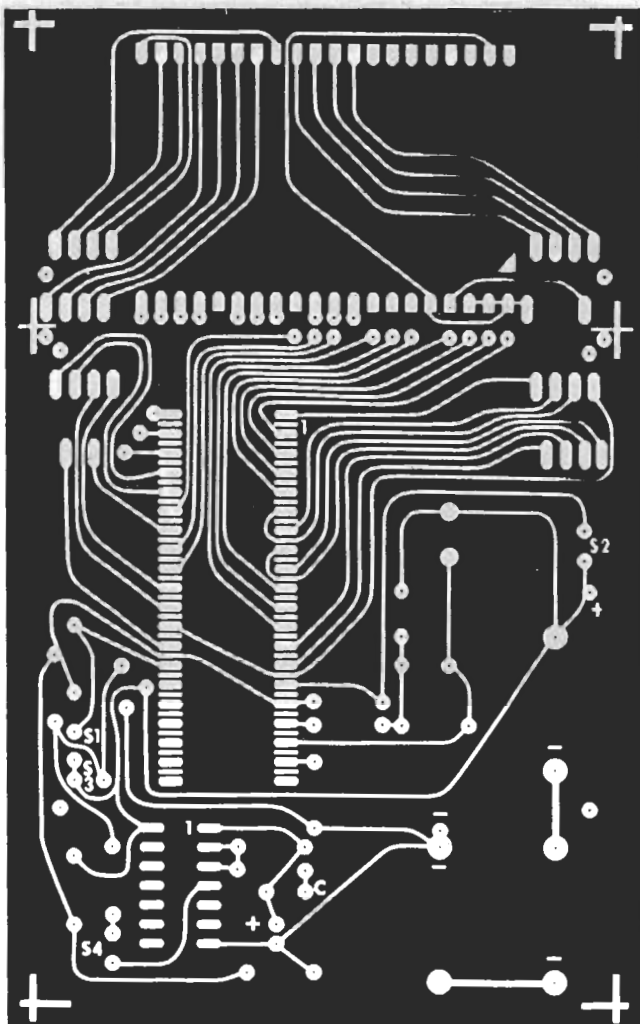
Actual-size foil pattern for the clock main and display board is at left. Component layout is shown above. After completing the board, carefully separate the two parts.
